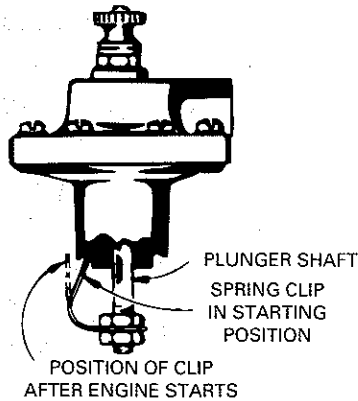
YC48 Low oil pressure switch for engines with magneto ignition
